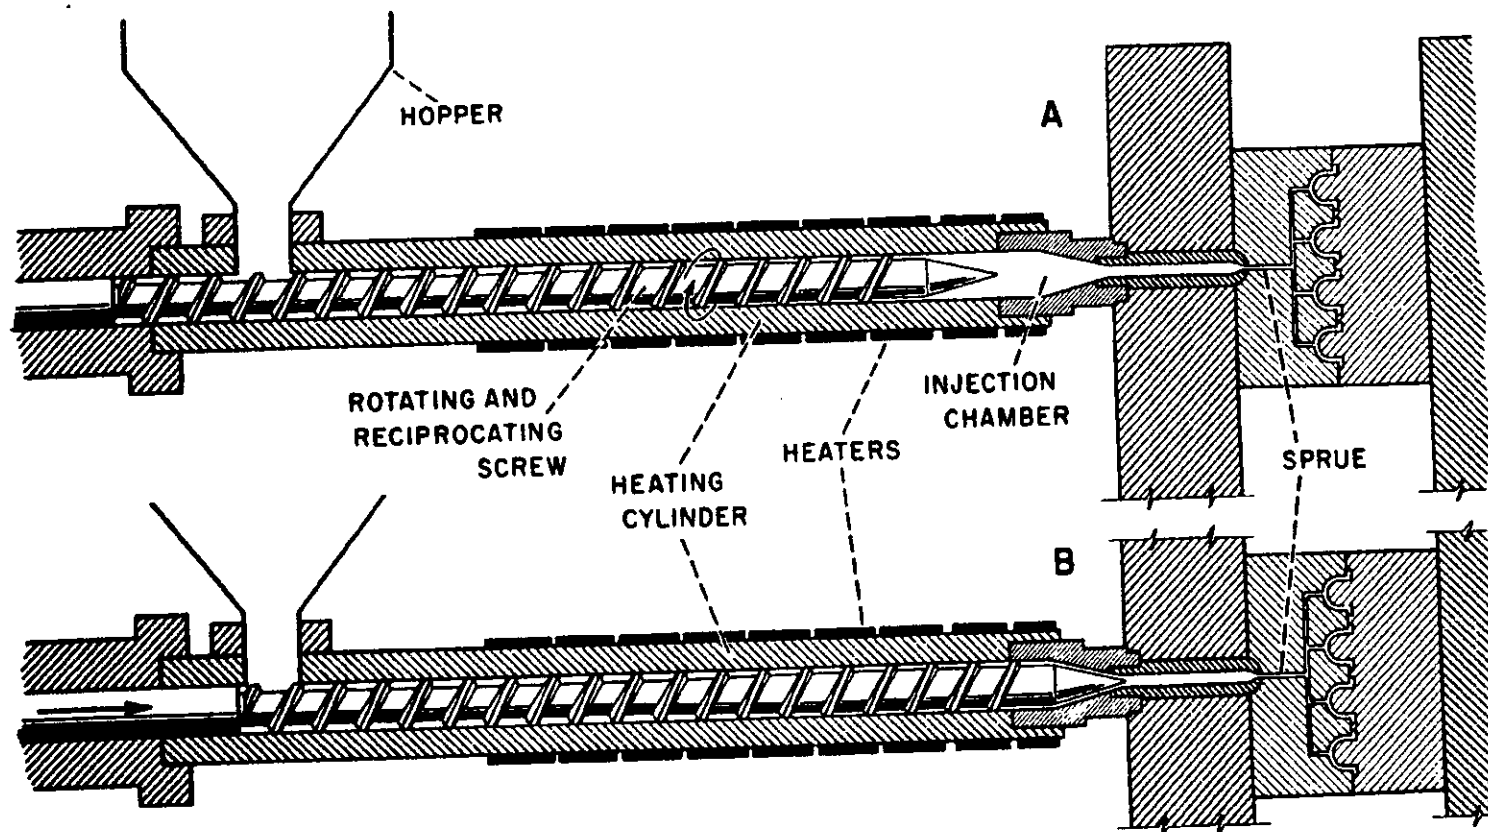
Schematic cross section of a typical screw injection molding machine, showing the screw in the retracted (A) and forward (B) positions.
